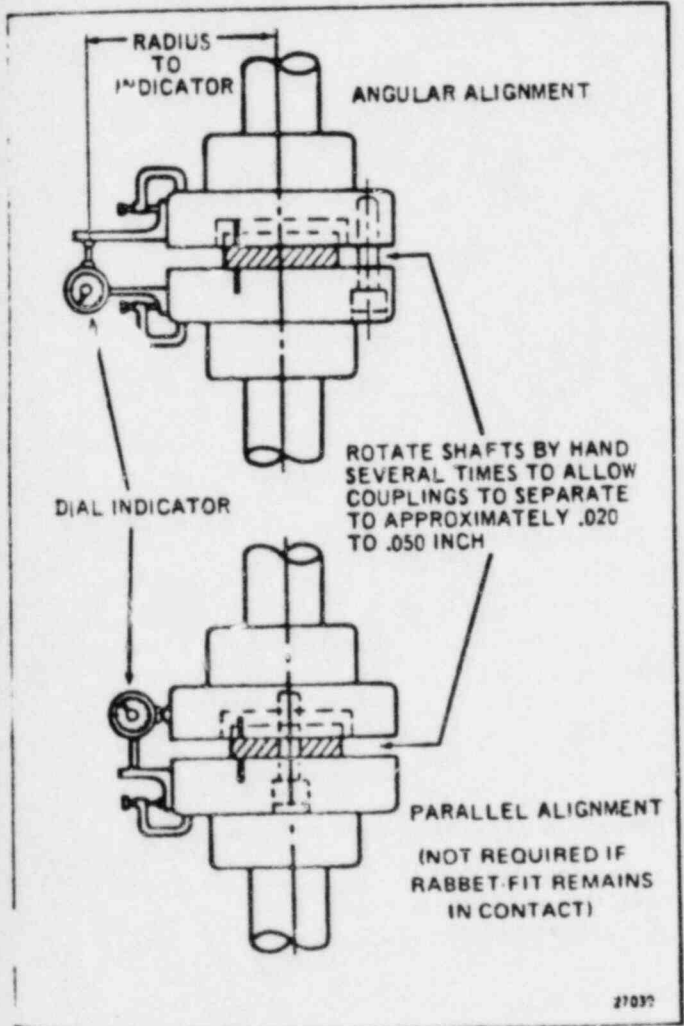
Test alignment with dial indicator (solid coupling)
